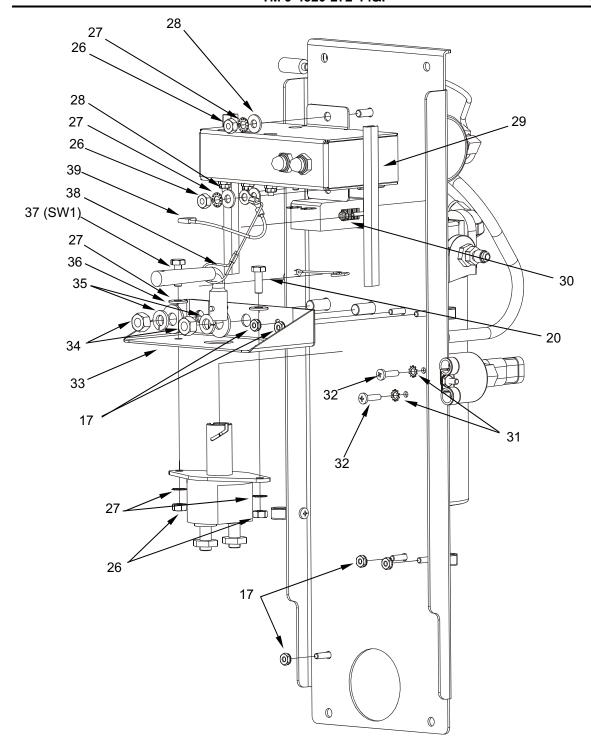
Fuel System Assembly (Sheet 3 of 5).
